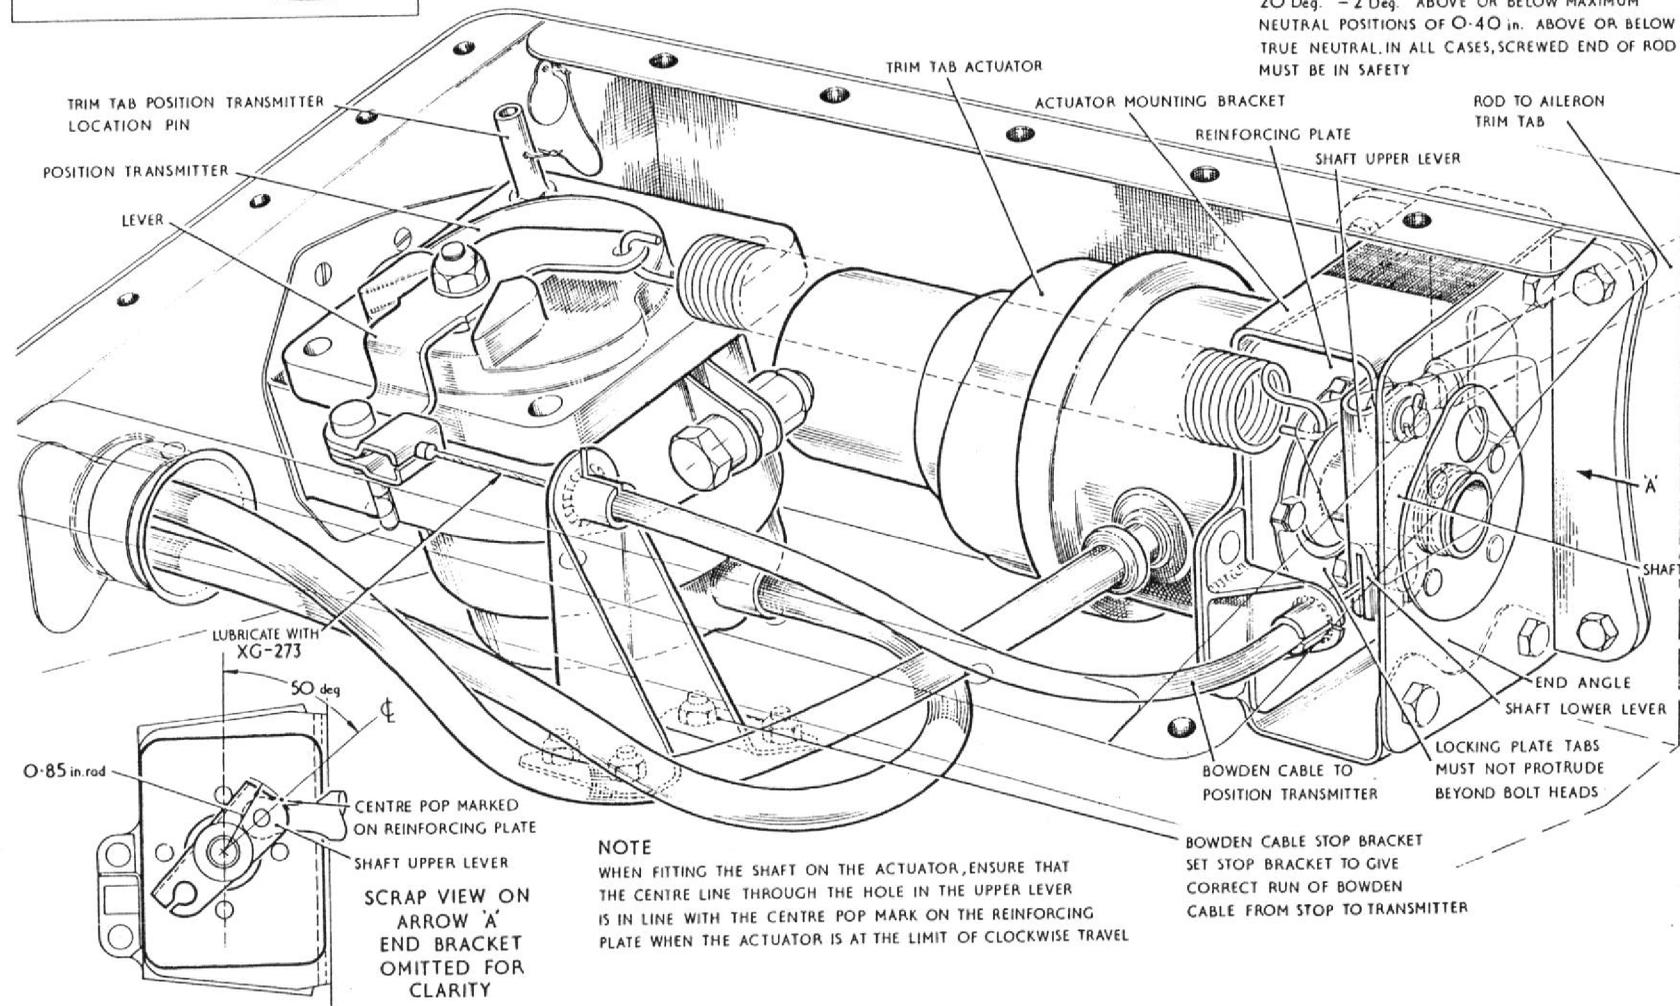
Fitting of aileron trim tab actuator and Desynn position transmitter
